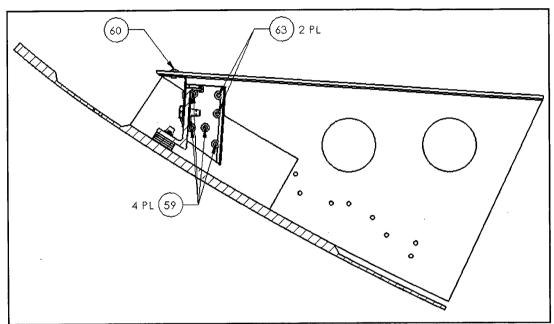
Rivet Locations on Airframe for Fwd Intercostal Assembly (TYP. 2 PL)
